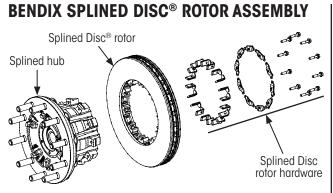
ConMet hub & Bendix Splined Disc rotor assembly
